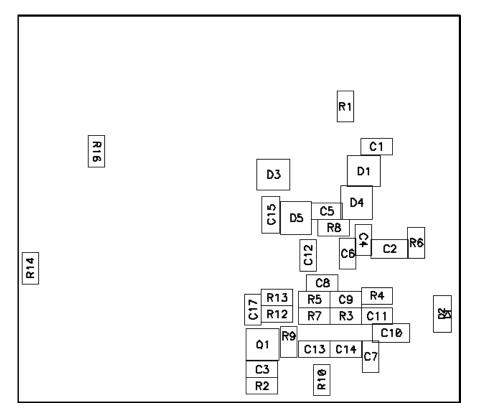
Bottom Side Component Assembly (viewed from bottom)
